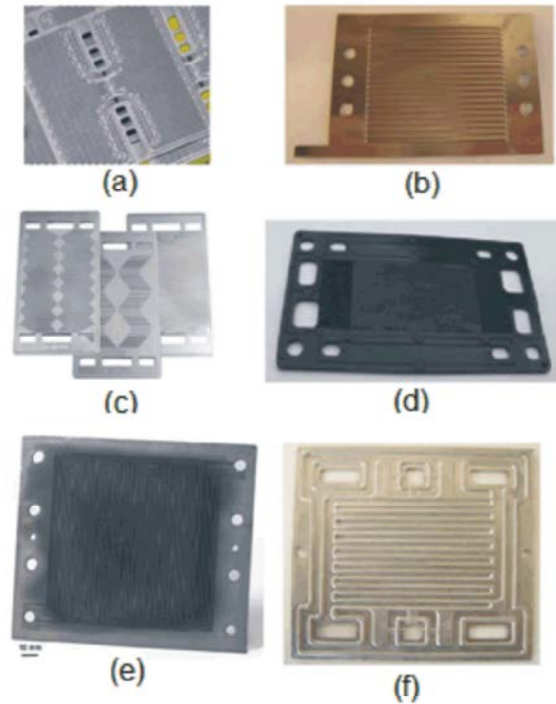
Single bipolar plate of (a) machined graphite (Graftech Co.), (b) stamped stainless steel sheet (GenCell Corp.), (c) photo etched stainless steel/titanium plate (Tech-etch, Inc.), (d) molded polymer-carbon composite, (e) molded carbon-carbon material and (f) sheet metal forming (rubber pad forming) of stainless steel [11,14].
